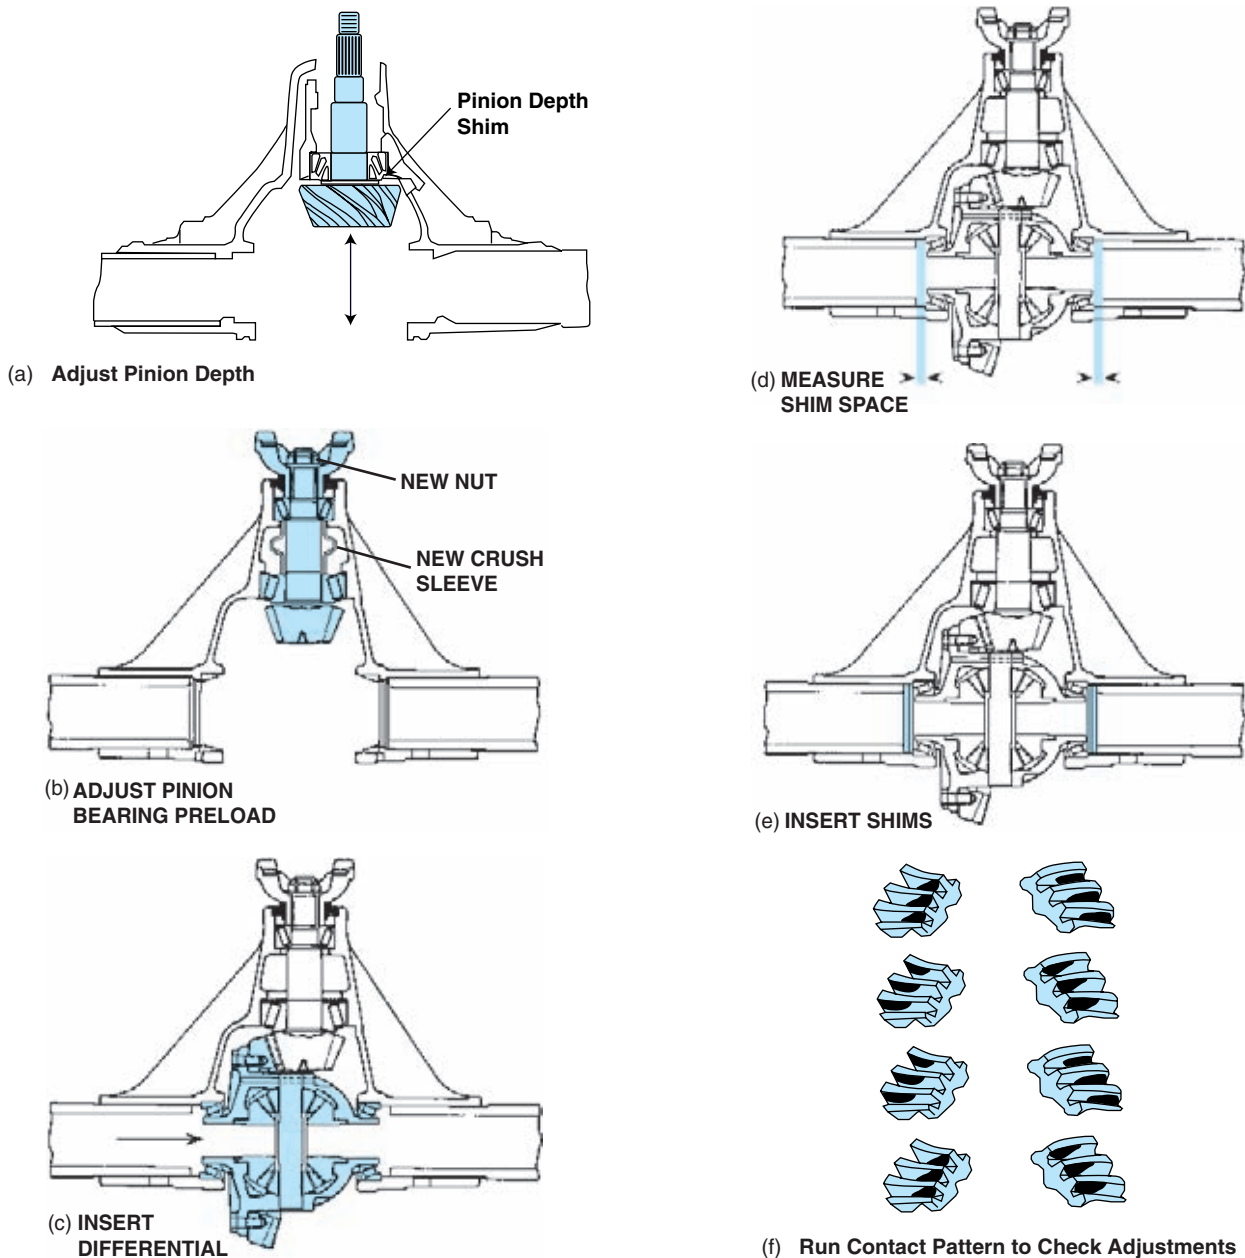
Procedure to adjust most drive axle assemblies.
